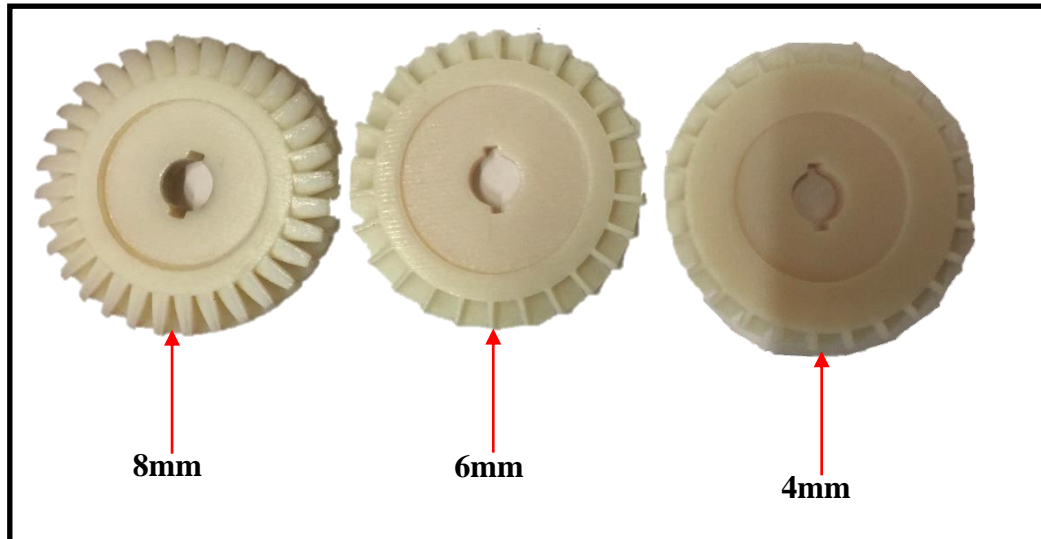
Pictures for manufactured rotors with blades heights (4mm, 6mm, and 8mm).
